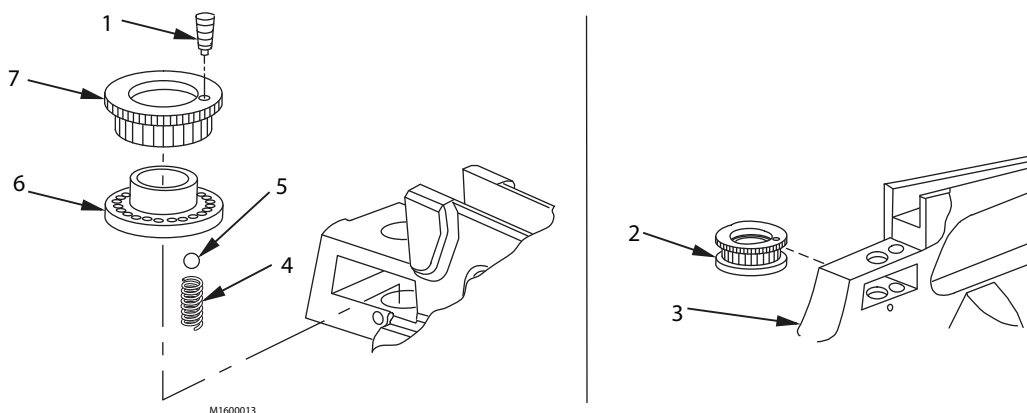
Assembly and Installation of Elevation Knob Assembly.
